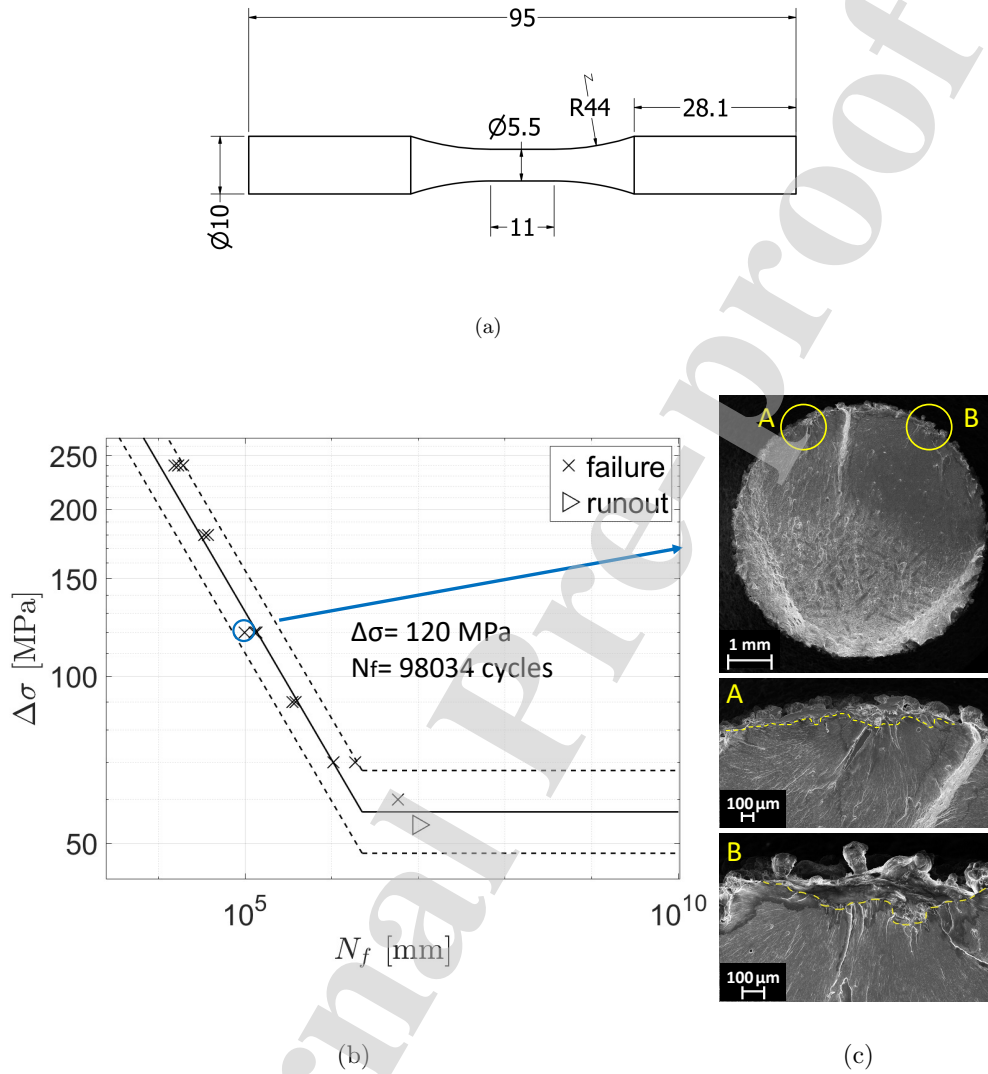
Fatigue test results: a) geometry of fatigue test specimens according to standard ASTM E466 [43, 46], b) S-N curve of the as-built SLM AlSi10Mg fatigue specimens tested at $R=-1$, c) details of defects at the fracture origin (multiple loci of fatigue crack initiation).
